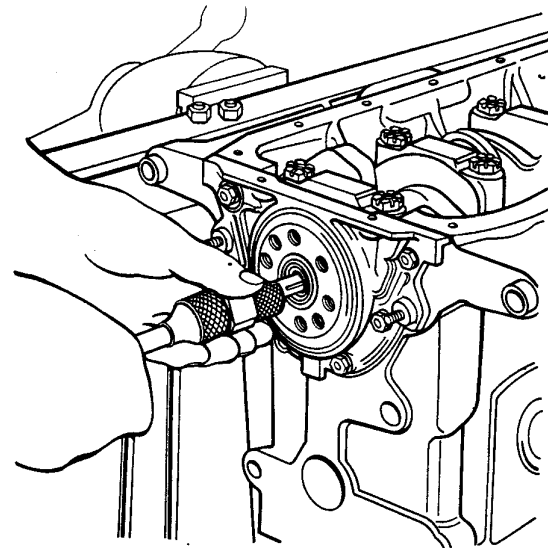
Pressing Out Gearbox Shaft Bearing from Crankshaft with Remover Tool A.40006
